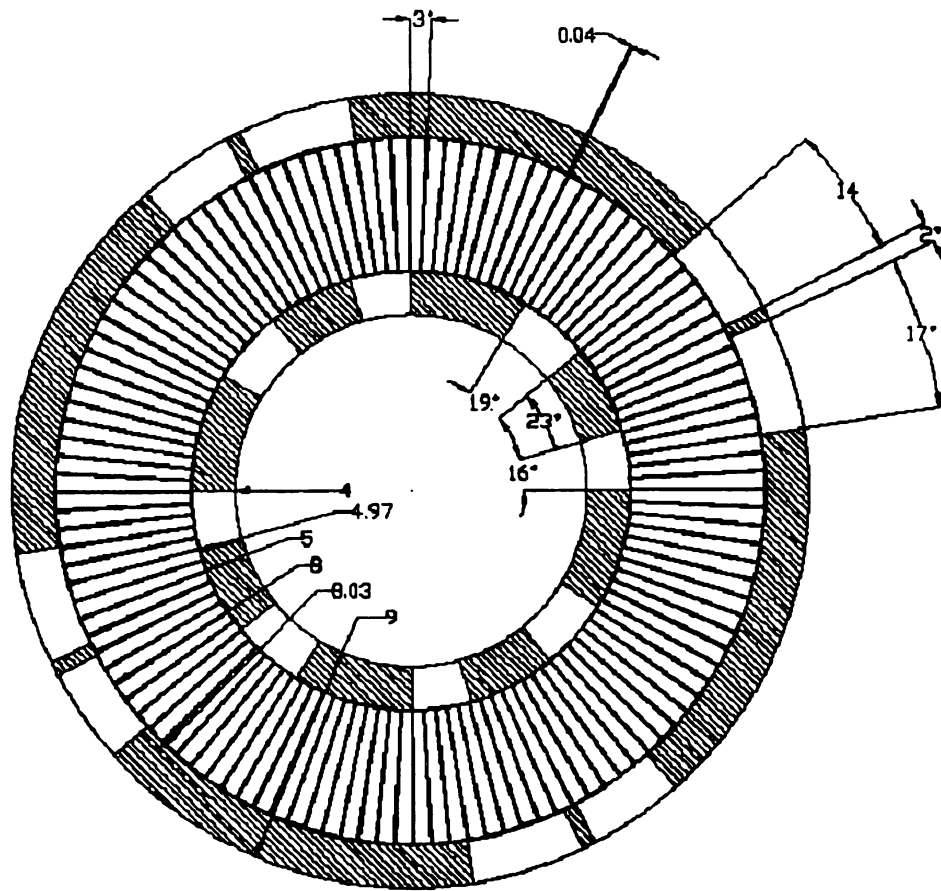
Radial wave rotor cross-sectional view [dimensions in mm].
